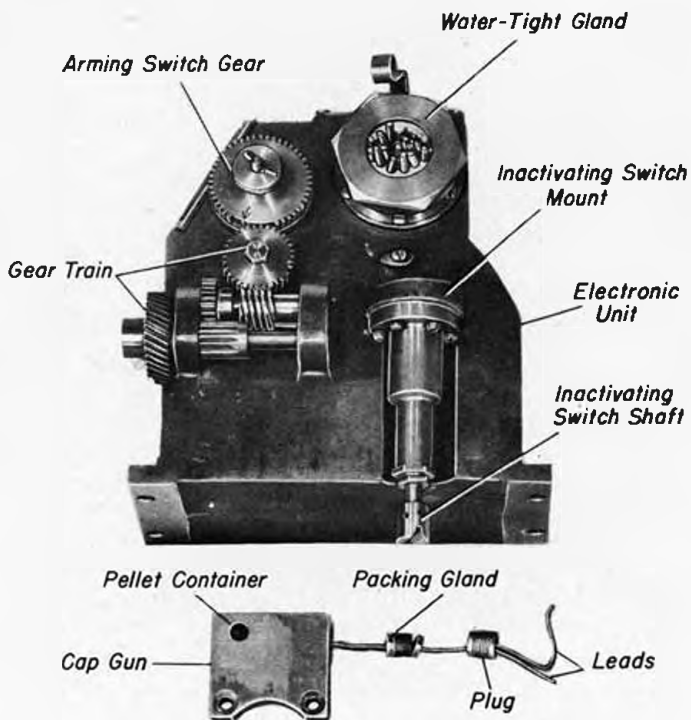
Mk 10-3 Exploder, Unit and Cap Gun
